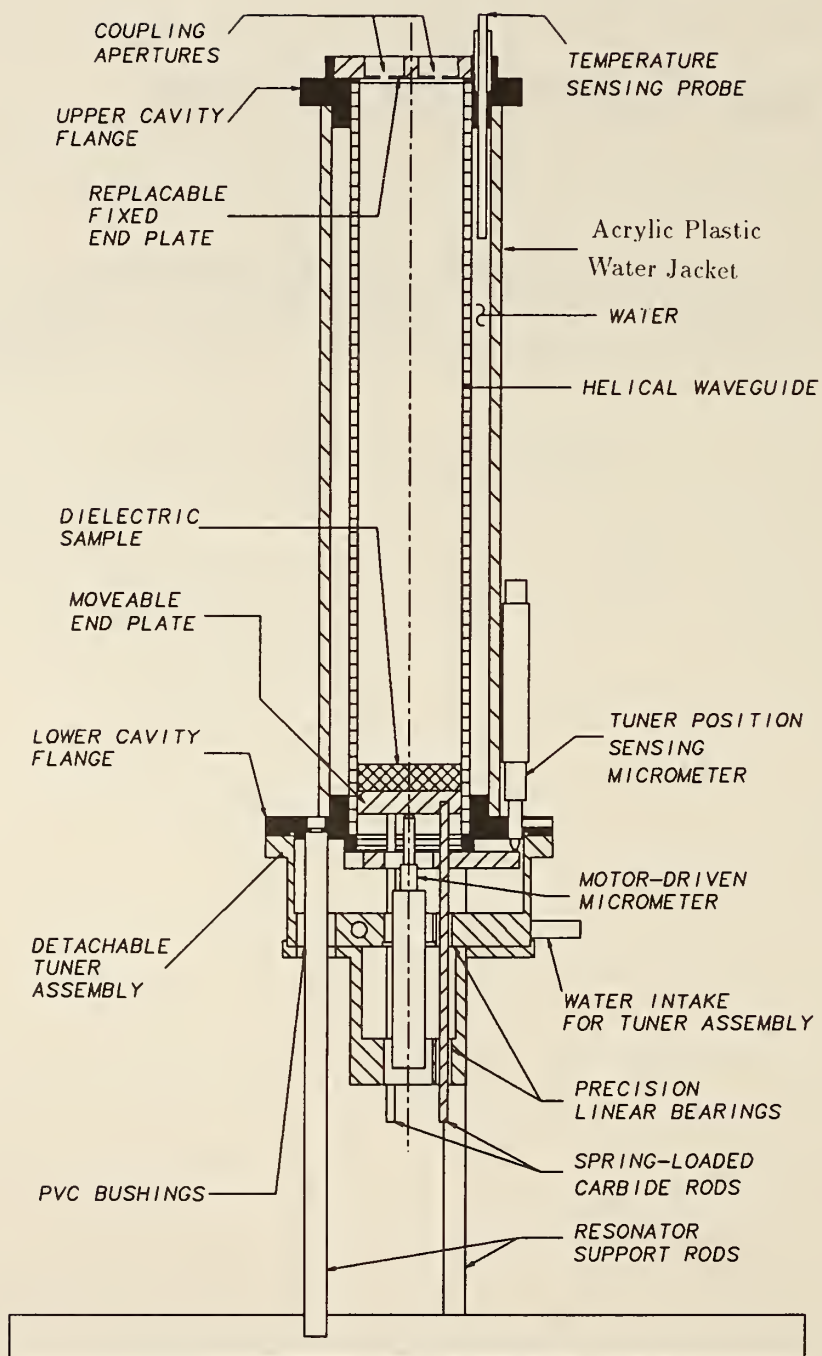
Cutaway assembly drawing of NIST cavity resonator.
